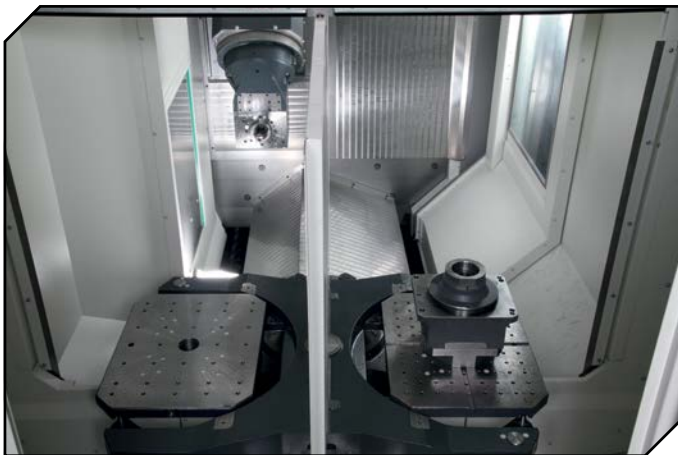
P-type machines are equipped with automatic pallet changers to allow workpiece setup in parallel with machining.
